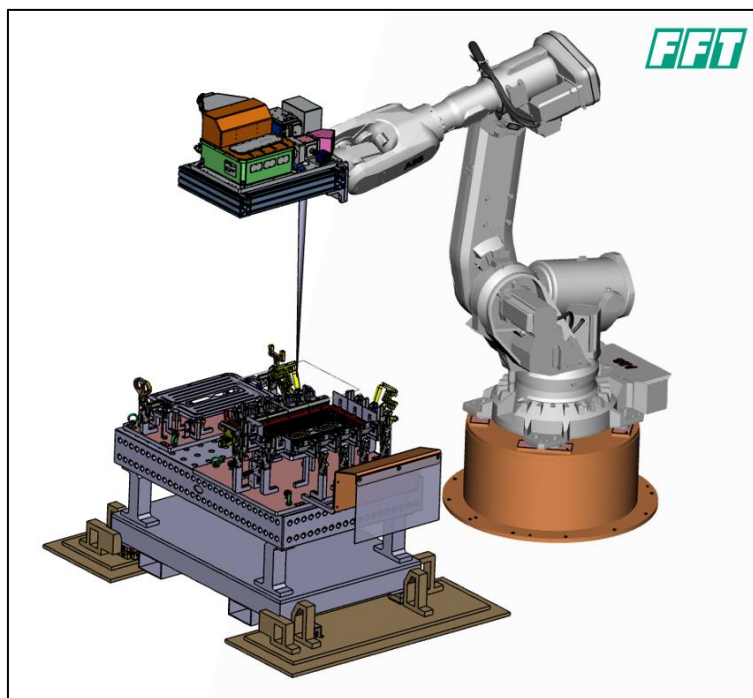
Robot-based laser welding, modular clamping and support systems
